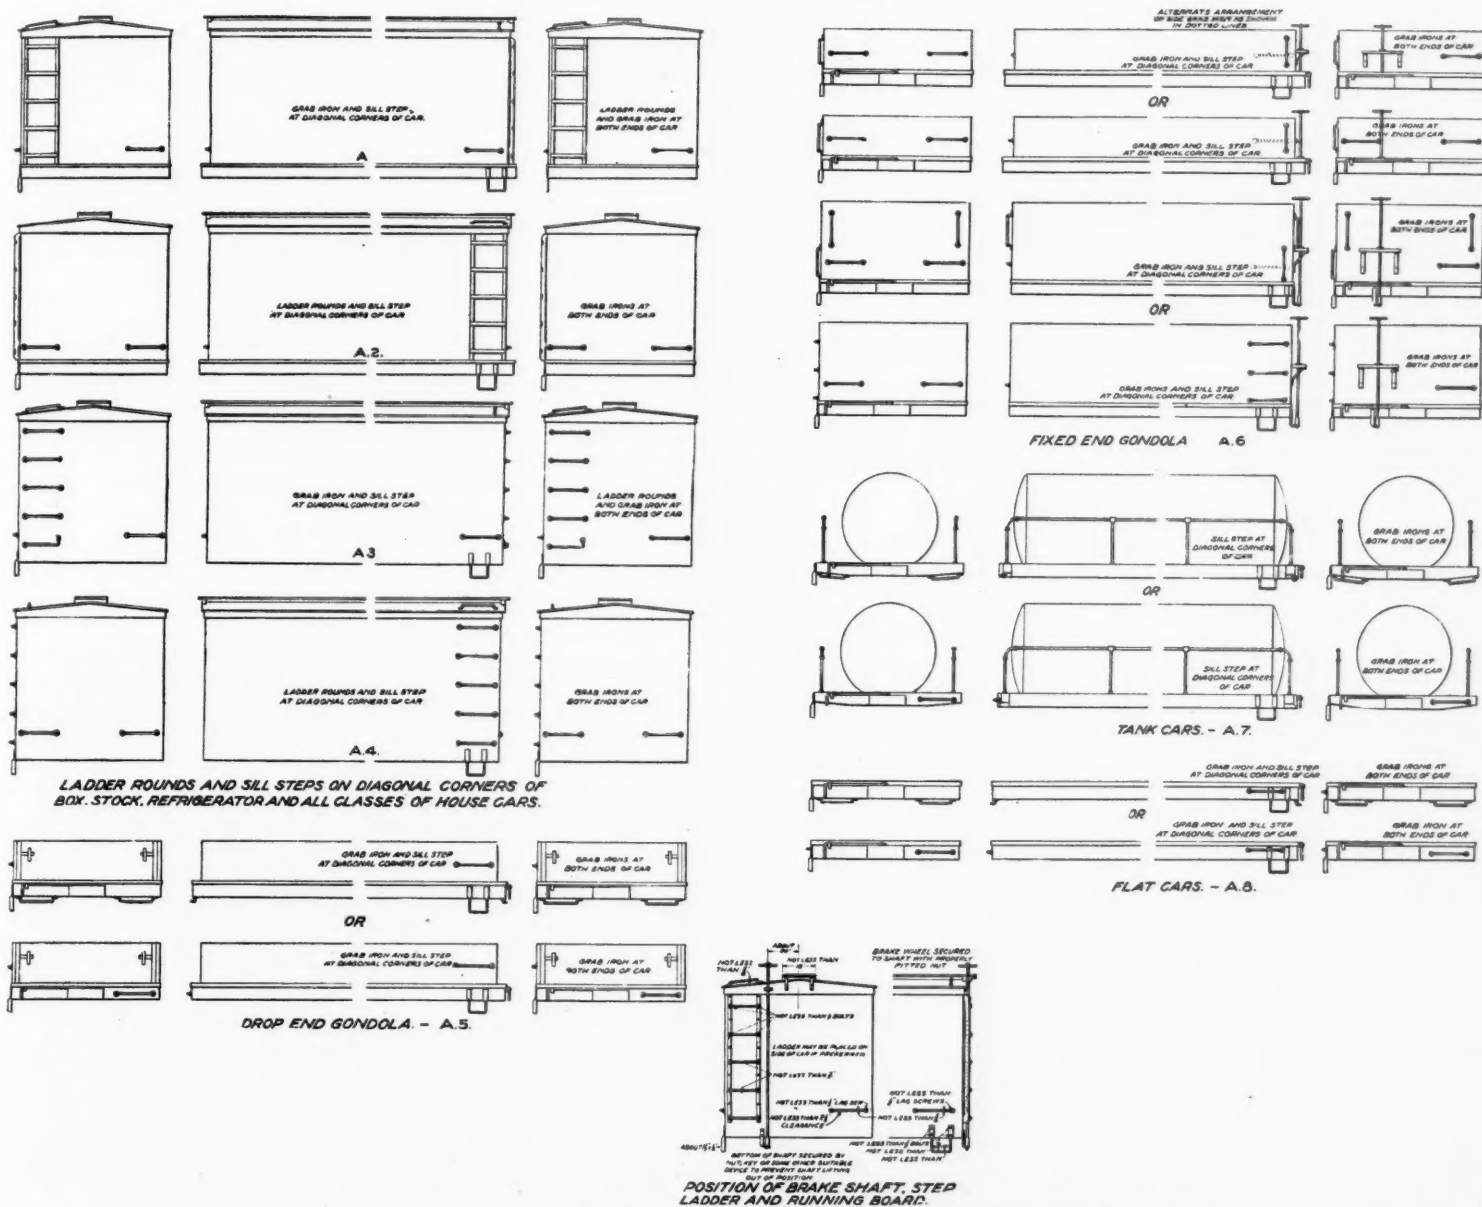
M. C. B. Standards for Protection of Trainmen; Revised Drawing of Sheet 19.
